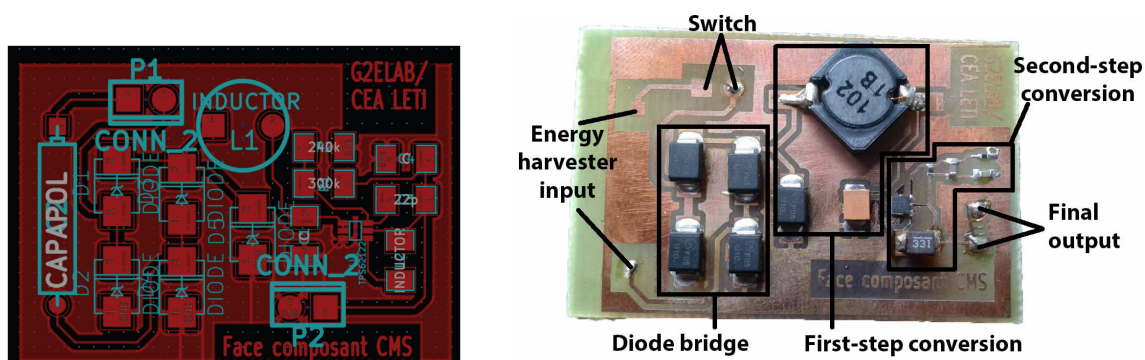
Design of the converter in KiCad, and final printed PCB card with mounted components.
